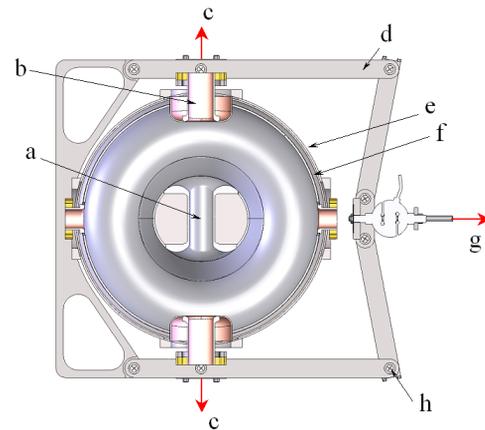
Section view of the tuner at the mid plane of the cavity: (a) drift tube; (b) beam tube; (c) resulting cavity; deformation force; (e) helium vessel; (f) outer conductor; (g) applied tuning force; (h) compliant pivot.
